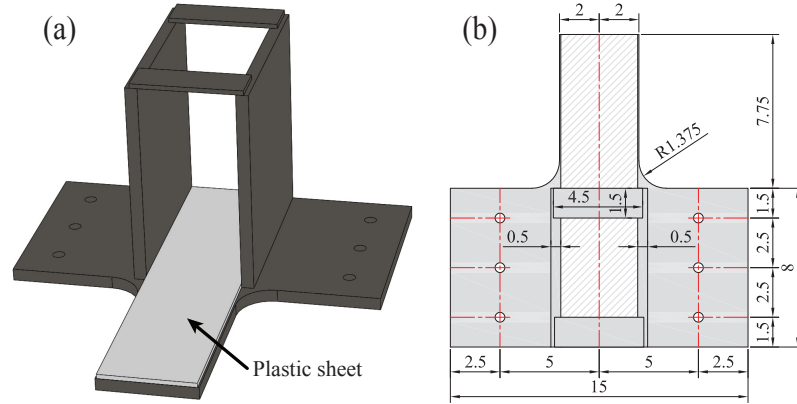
Design of the sliding rail of specimen assembly: (a) perspective view and (b) top view (units: inch).
